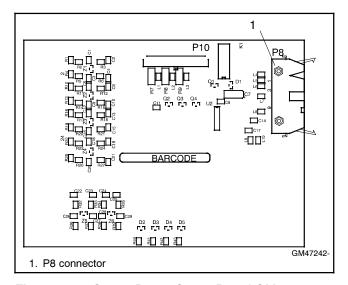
Gauge Driver Circuit Board GM49791-2
